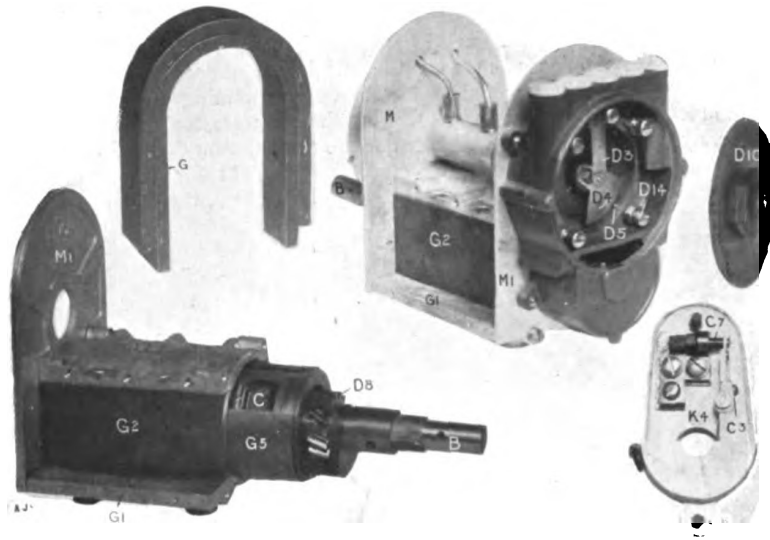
The Remy System—Views of the magneto partly dismantled. On the left the magnet base plate to which the pole-pieces are attached is shown with the armature partly withdrawn. Above is a pair of the magnet elements, alongside which is another view of the partly dismantled magneto looking on the opposite end, and showing the high-tension distributor mechanism. Beneath is a view of the low-tension contract-breaker shown separately.
